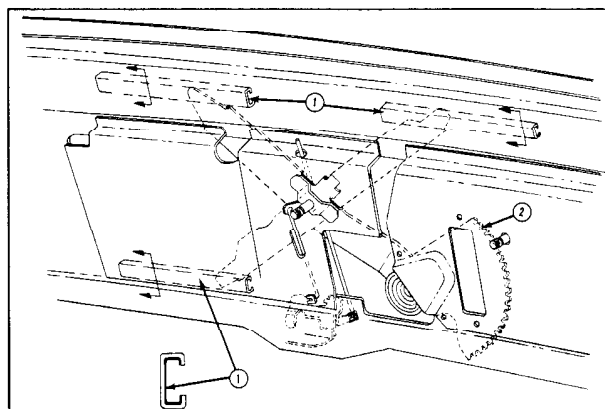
Back Door Window Regulator, Cams & Guides "35" and "45" Styles
